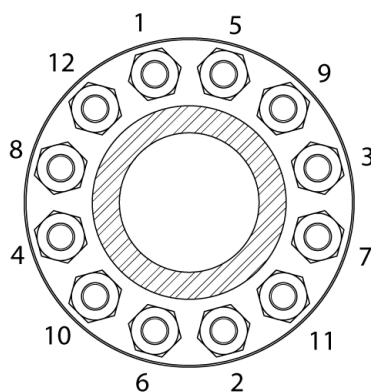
Bolt Tightening Sequence (12-Bolt Flanges)
